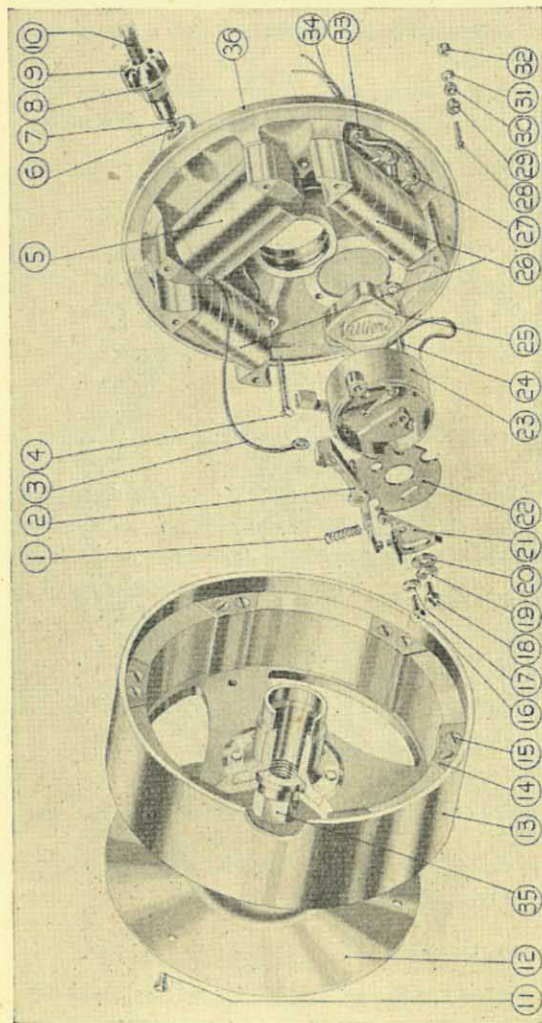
EXPLODED VIEW OF MARK 1F UNIT MAGNETO.
